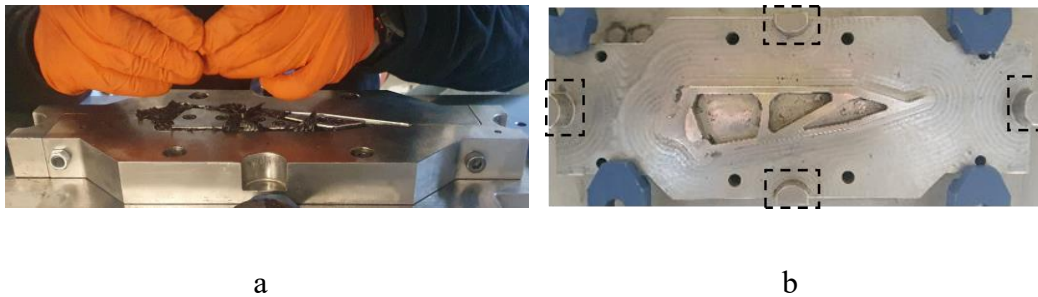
Molds for the production of the pedal lever: a) lower (female) tool; b) upper (male) tool. The dashed boxes evidence the centering pins
